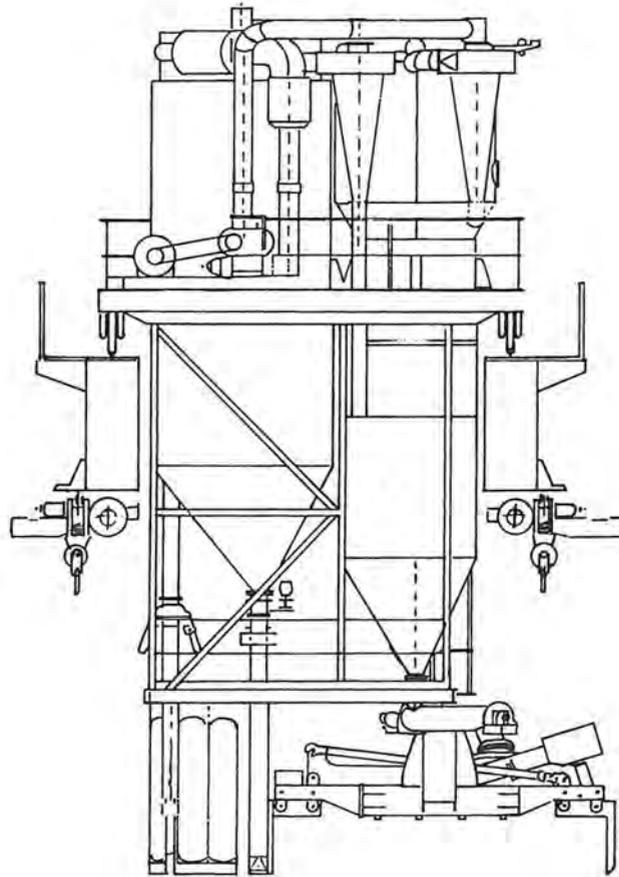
The NKM multipurpose crane is equipped with a spoutvacuum system, cyclone separator, fabric filter, and an anode tong.
